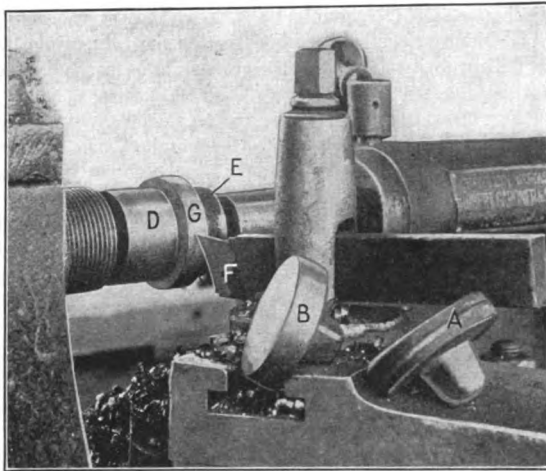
ROUGH-TURNING BASE-PLATE FORGINGS
